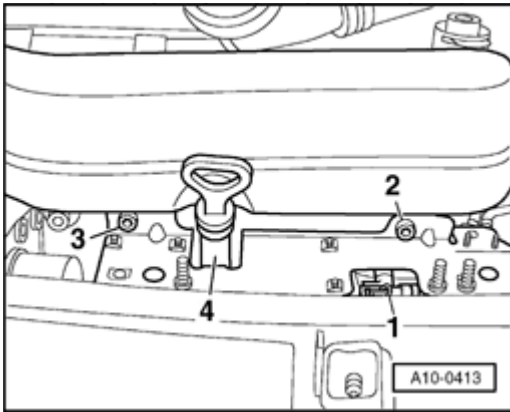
Identifying Electrical Change-Over Valve Connector, Intake Manifold Brackets & Dipstick Tube
